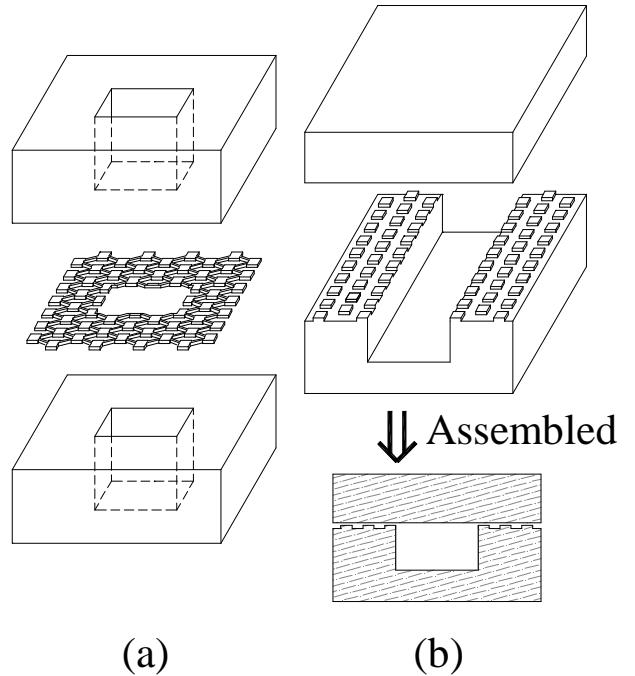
Two techniques for implementation of the PCJ: (a) waveguide flange with PCJ formed by free-standing metal foil, and (b) waveguide joint with PCJ made of metal pillars formed on one piece.
